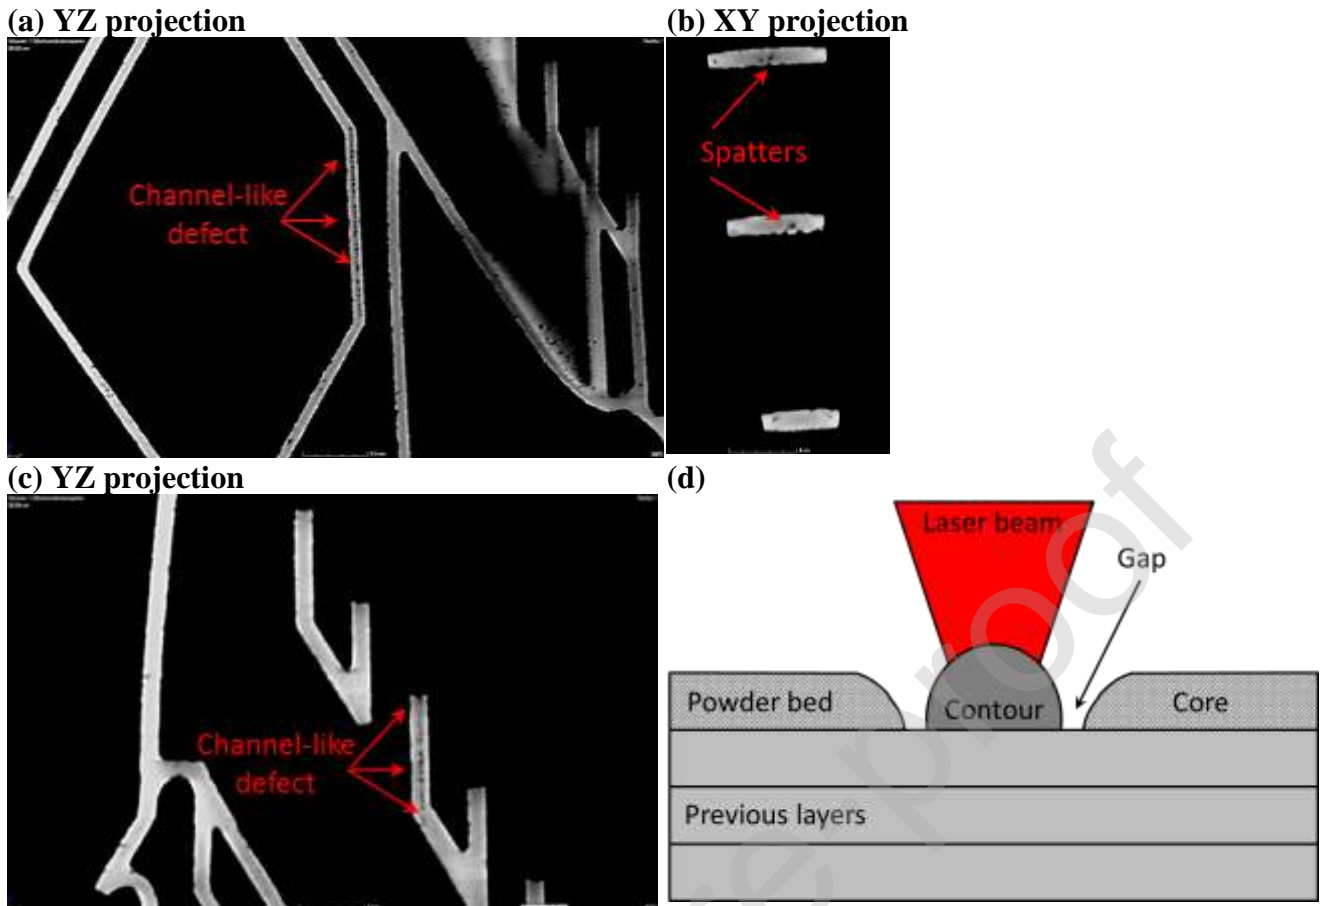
Micro-CT images showing channel-like defects (a, c) and spatters (b) inside of CAB prototype; diagram showing the possible mechanism of appearance of channel-like defects (d).
